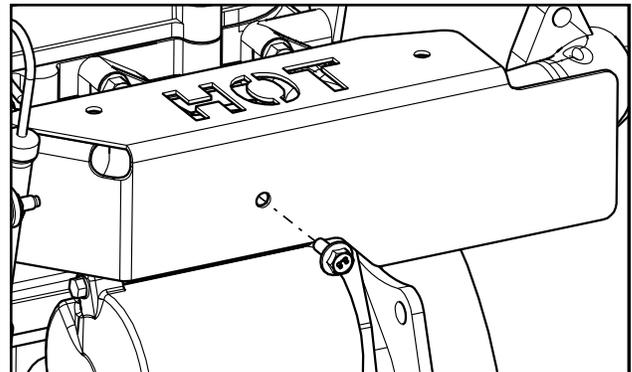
(Manifold Heat Shield Side Fastener)
